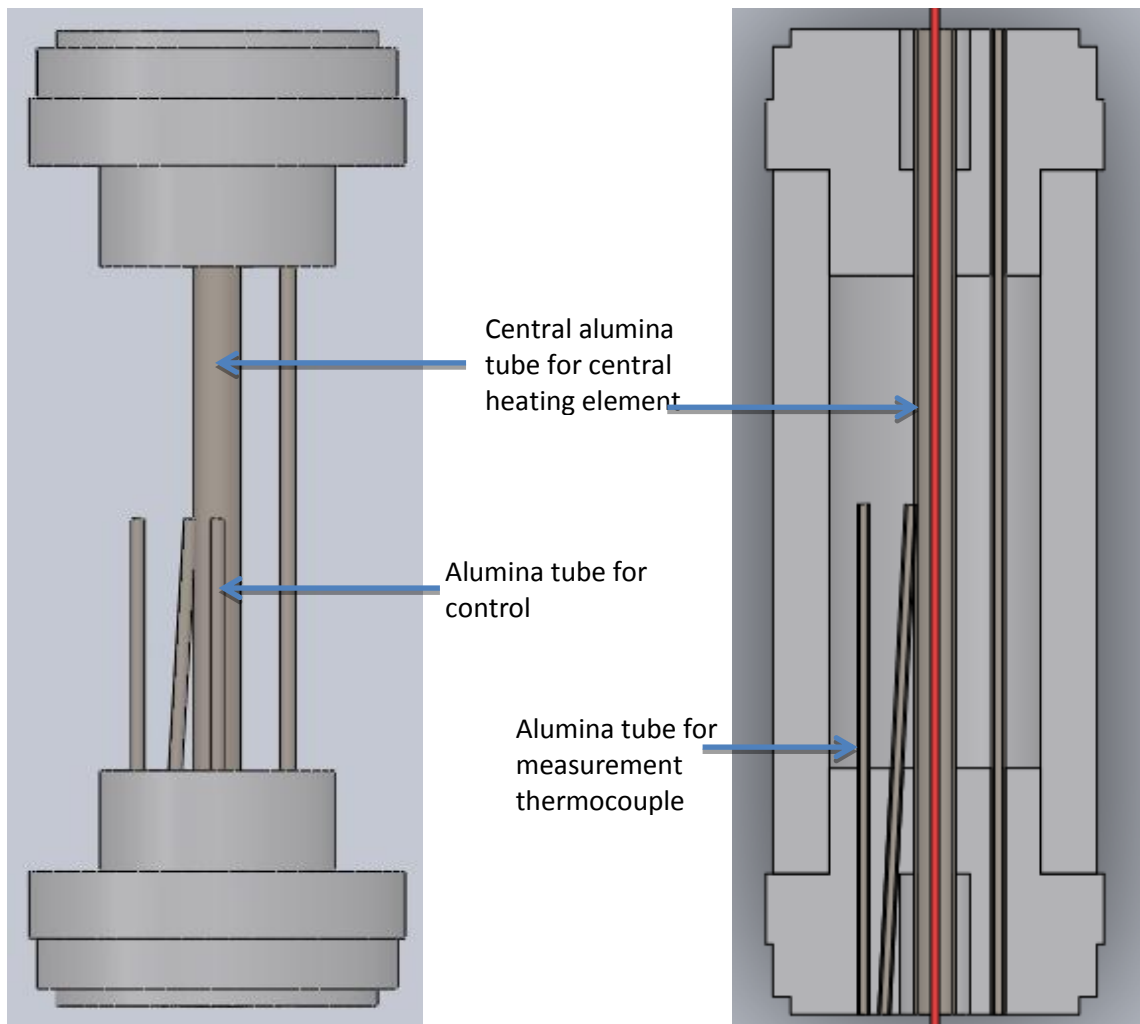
a) A section view of the complete assembly of crucible container with central heating element (red)
